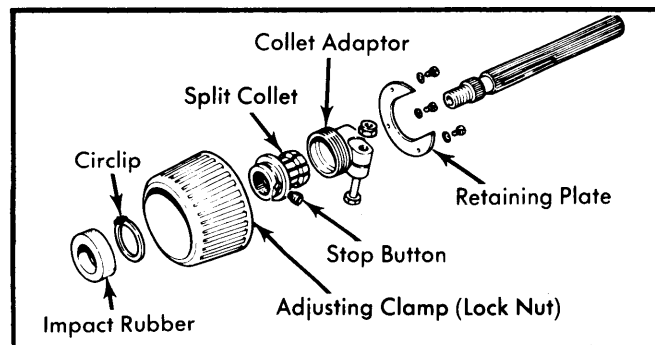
Exploded View of Steering Column Adjusting Clamp
